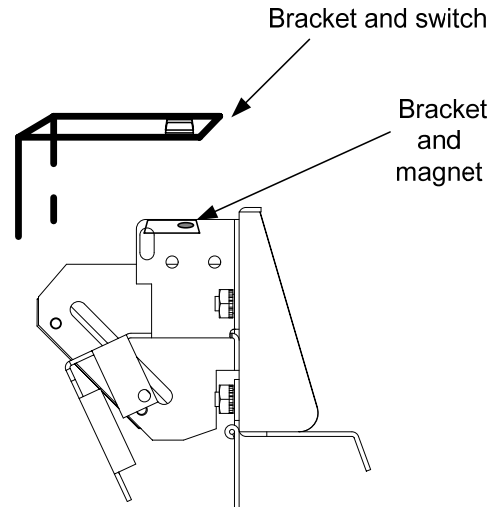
A cross-brace mounted bracket holds a switch and a tilt-plate mounted bracket holds the magnet in the new switch arrangement.
